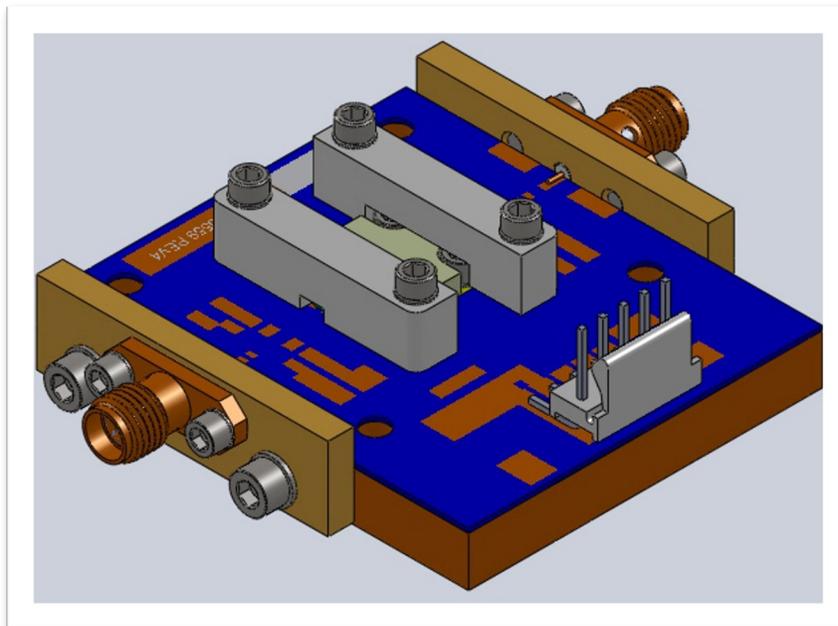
CMPA2560025F MMIC Power Amplifier and CMPA2560025F-TB Test Fixture
